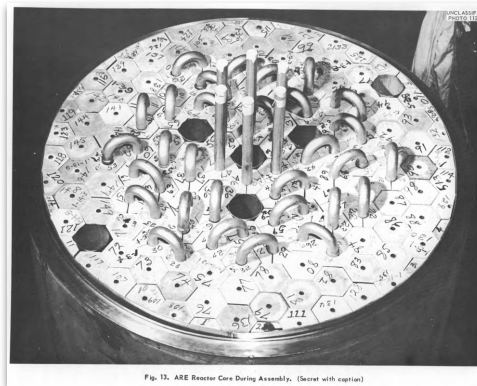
ARE Reactor Core During Assembly. (Secret with caption)
